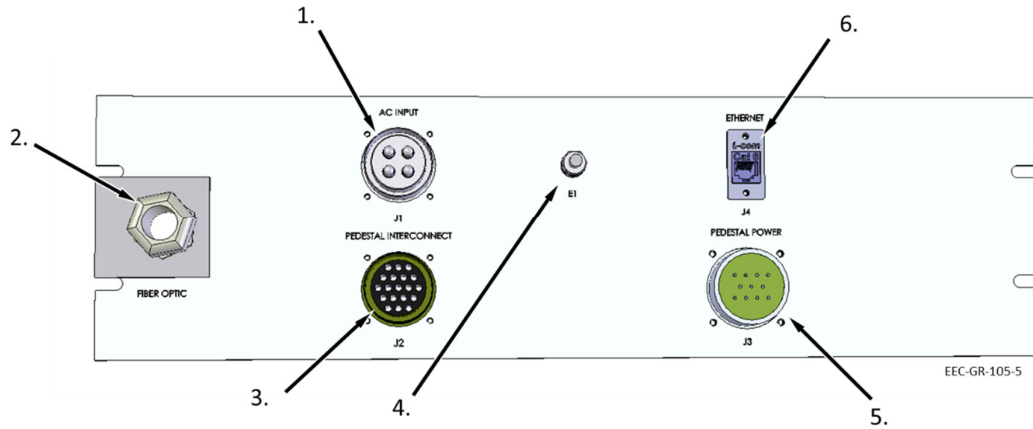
I/O Panel Assembly, 19-inch Rack (134938-100)
